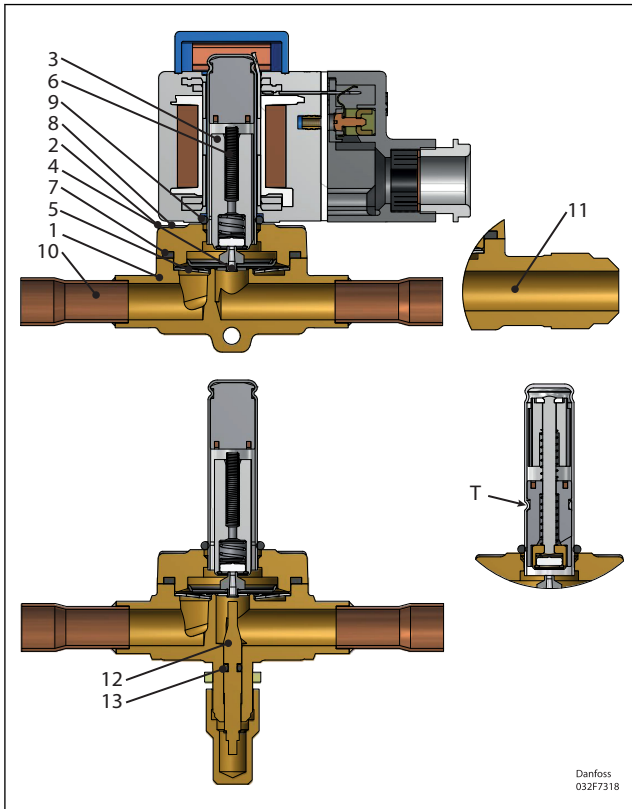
EVR 15 - EVR 18 Solder, flare, and flange
